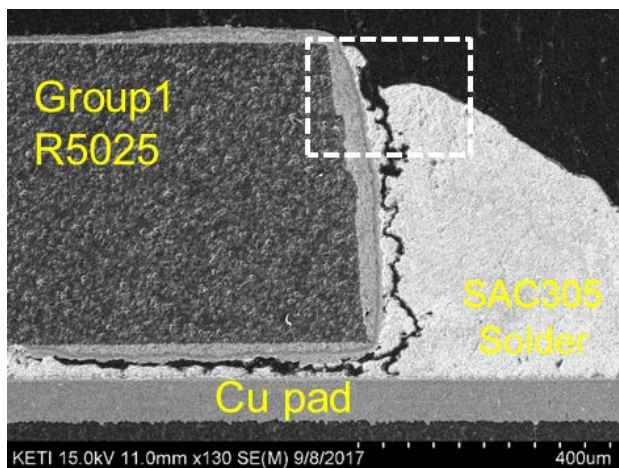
Cross-sectional SEM image of 5025 chip resistor solder joint mounted on Group 1 area of VECU wiring board after 1500 thermal shock cycles
